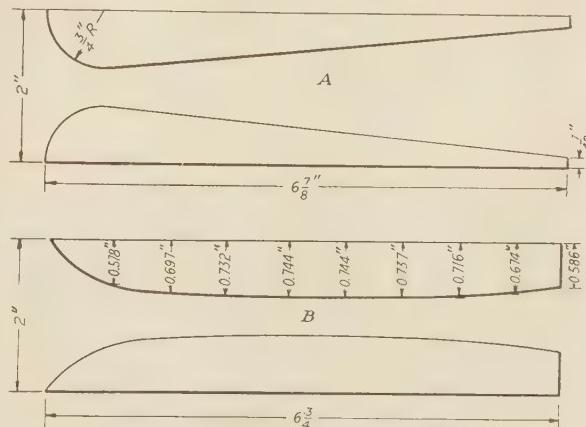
DIMENSIONS OF NOZZLE BLOCKS
